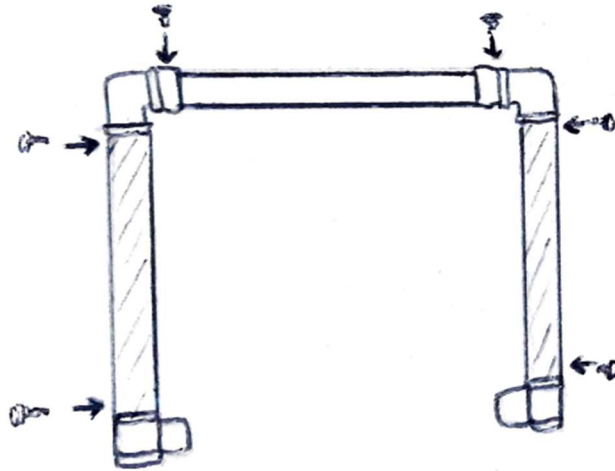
Drill hole and screws along supporting arm (repeat for two pieces).
